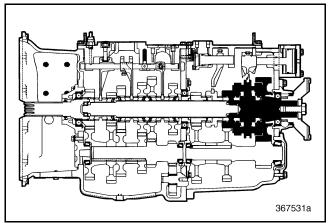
Rear Mainshaft and Synchronizer Component Locator (T313L/T318L Shown)
